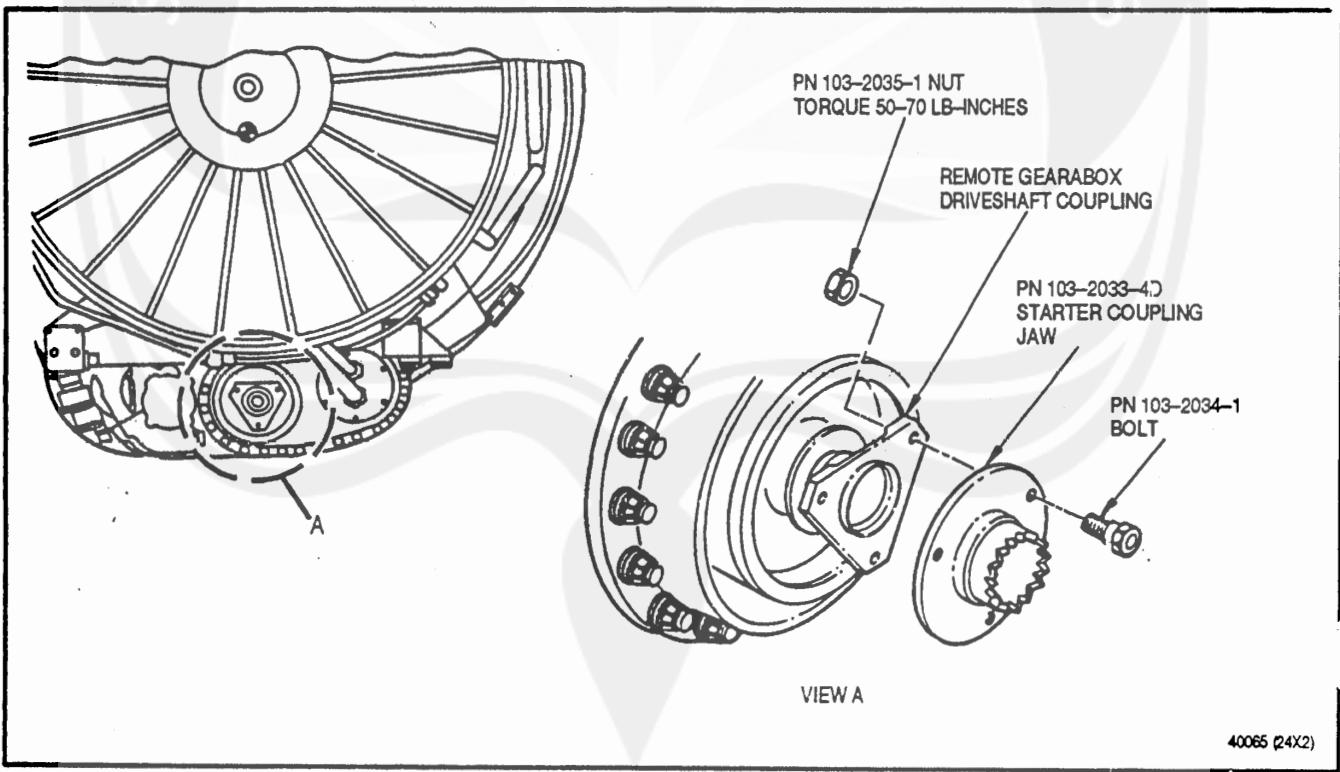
Starter Coupling Jaw Inspection (Sheet 2 of 2)
